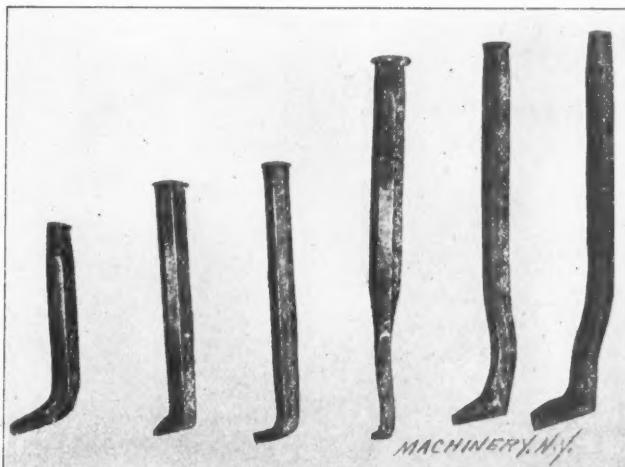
Staking Tools used to Repair Worn and Cracked Drop Forging Dies
